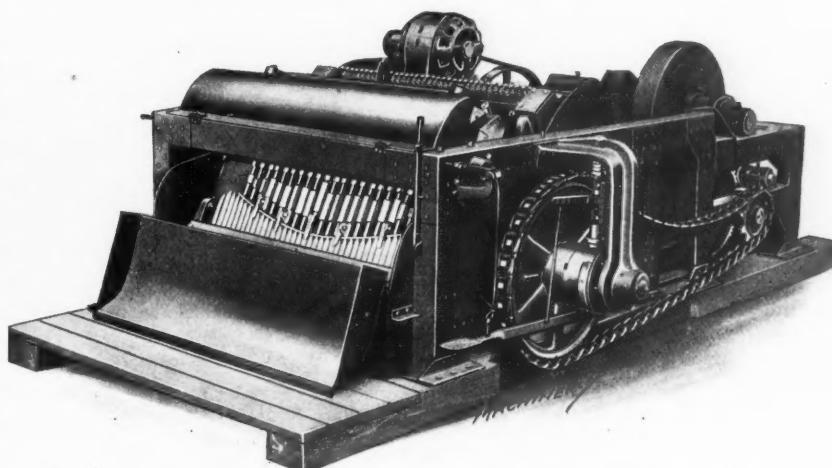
Lewis Spring Machine with Cover opened to show Forming Holder
